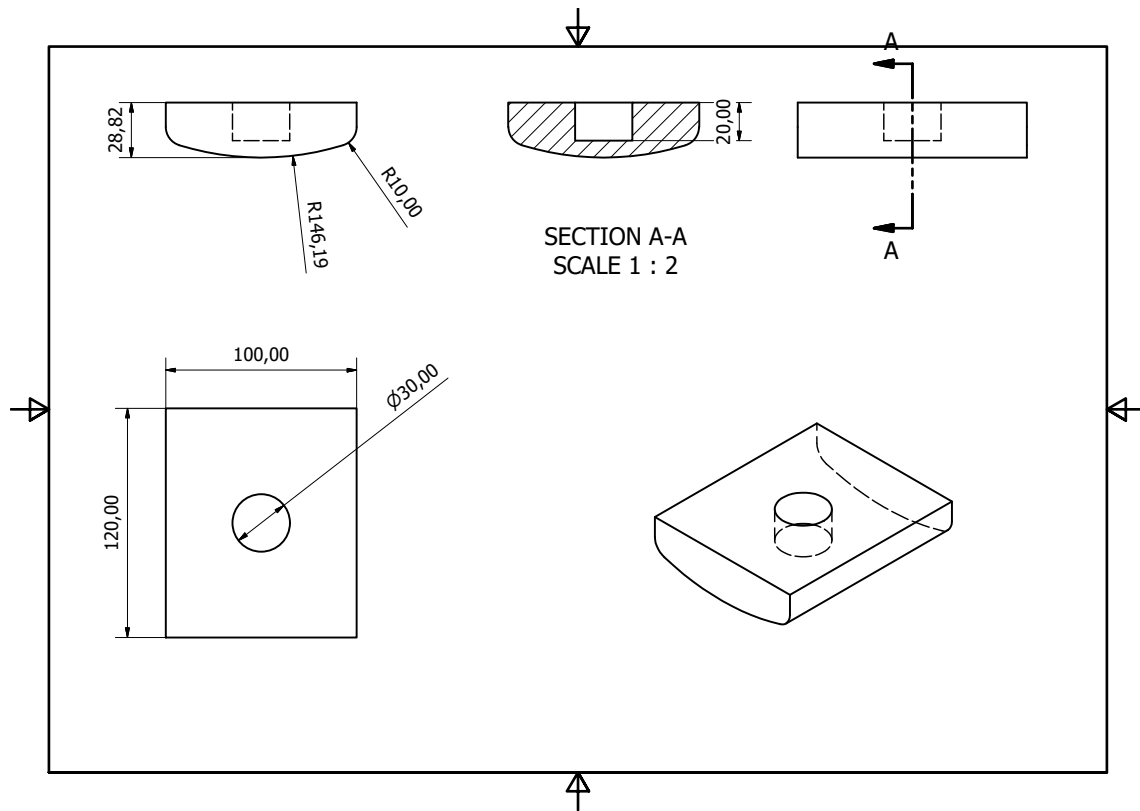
Drawing of the tool which connects to the uniaxial compression test machine.
